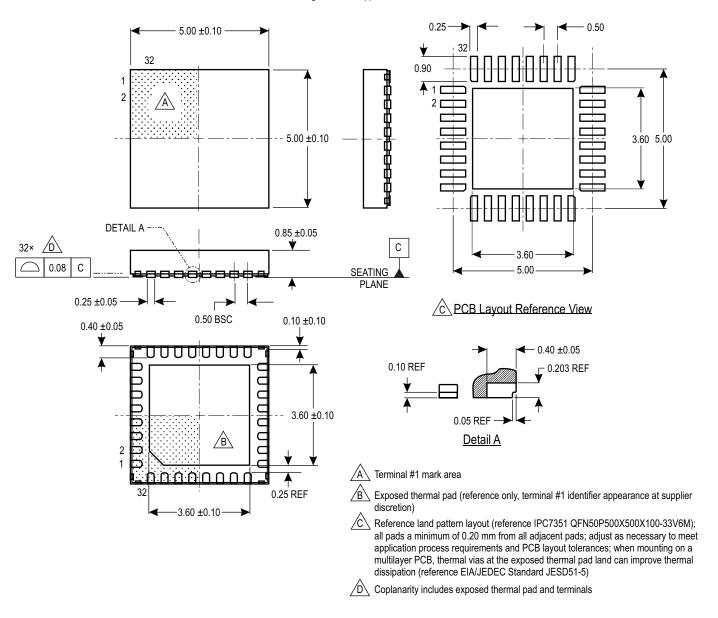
Package ET, 32-Contact QFN with Exposed Pad and Wettable Flank
